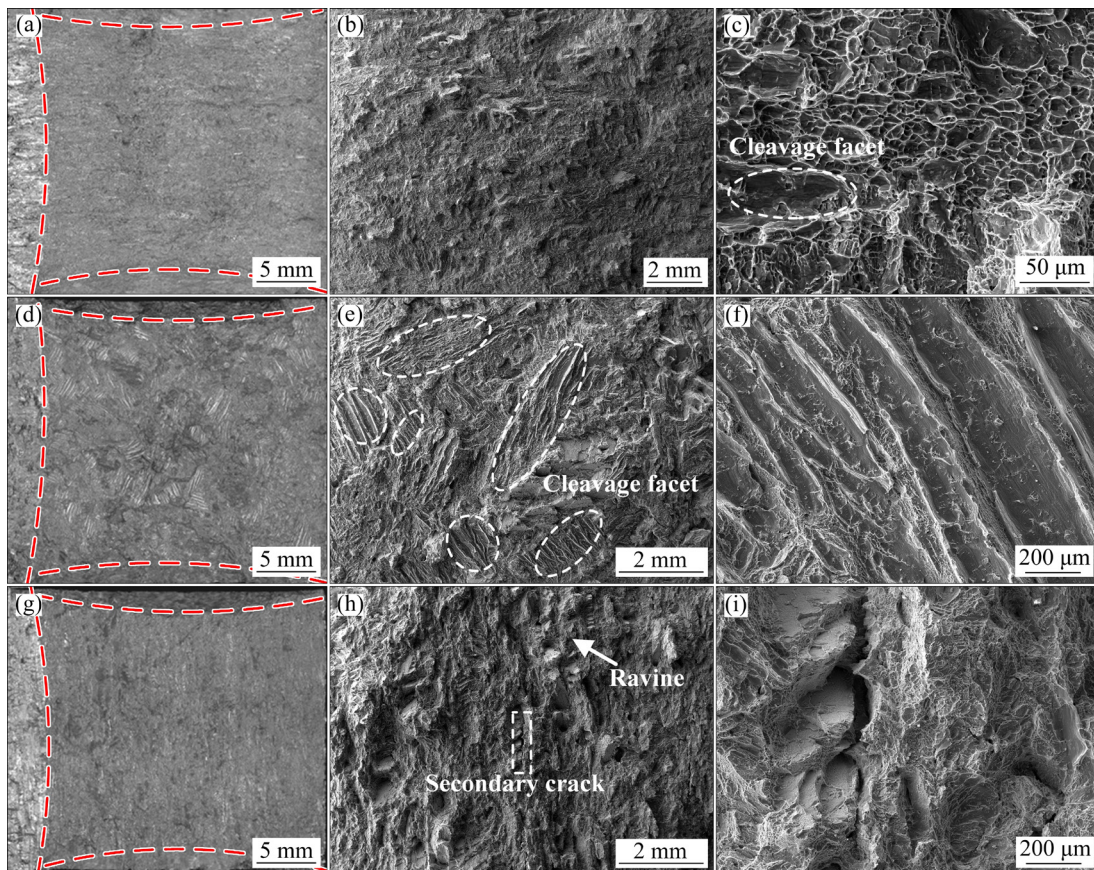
Fracture surfaces of K_Q specimens with different orientations: (a–c) RD–TD specimen; (d–f) AD–RD specimen; (g–i) RD–AD specimen
